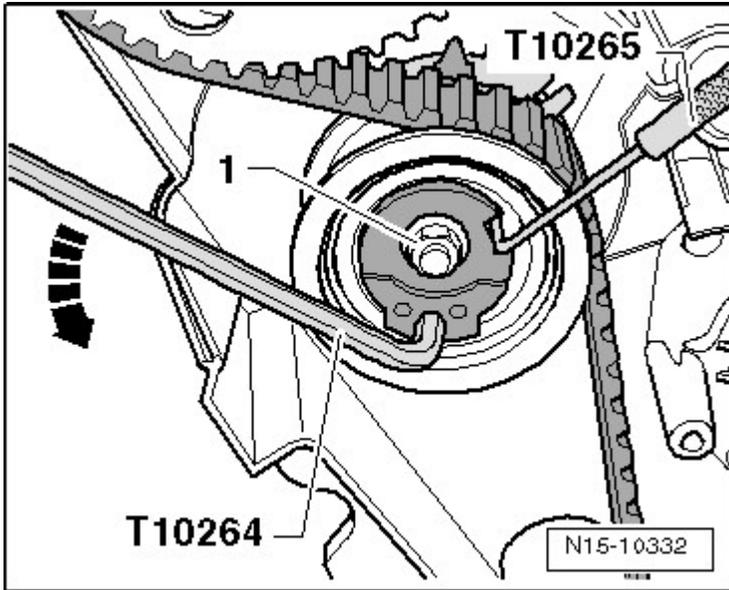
Identifying Long Reach T10264 And Locking Tool T10265
